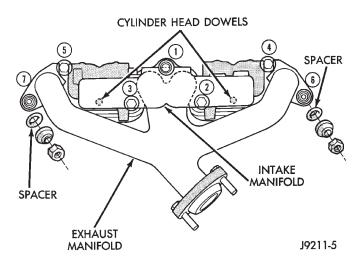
Intake/Exhaust Manifold Removal/ Installation—2.5L Engine
